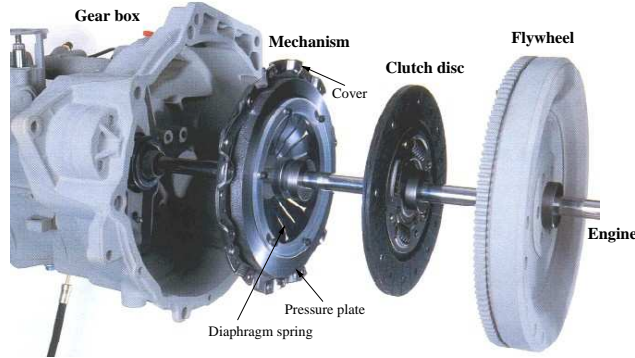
View of the clutch. The clutch disc is crushed between the mechanism pressure plate and the flywheel to transmit the torque from the combustion engine to the transmission.
